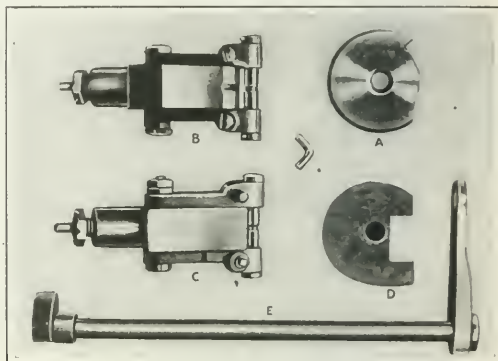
Screw Machine Tools for making Bent Slide Lock shown in Fig. 8
